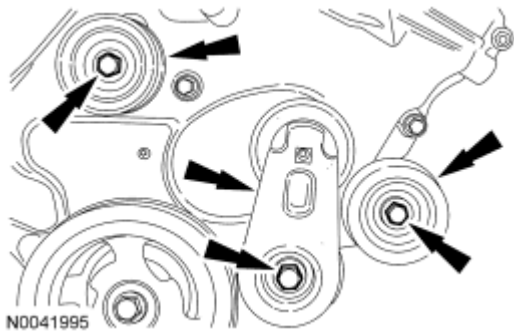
Locating Accessory Drive Belt Tensioner And Idler Pulleys
